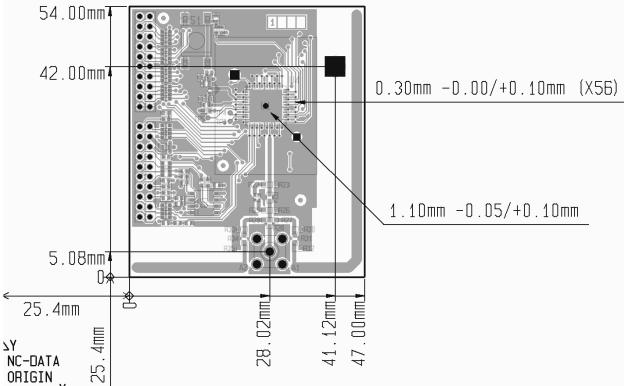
ZDB5101 Z-Wave Development Board PCB outline (Top View)
